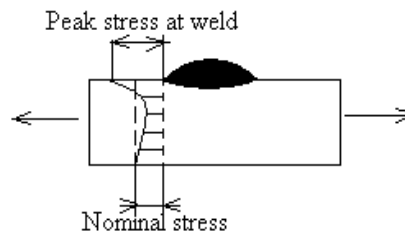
Stress concentration caused by the weld toe geometry.
